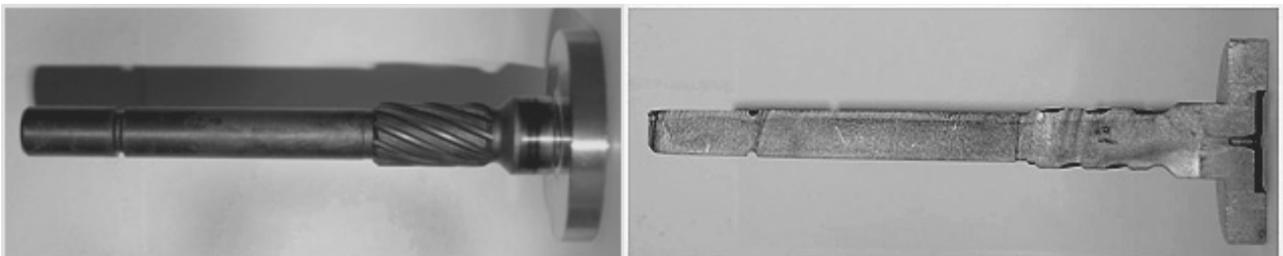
Heat treated shaft (left). Longitudinal cross-section of the planetary shaft (right). Cutting was made with water jet cutting machine. Thickness of hardened case is approximately 1.4 mm
